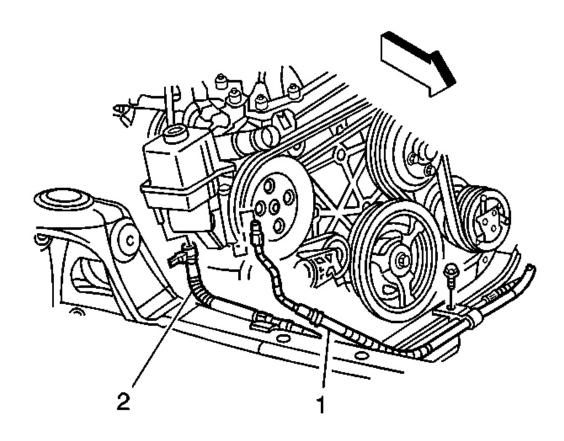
Removing/Installing Power Steering Hoses Courtesy of GENERAL MOTORS CORP.
